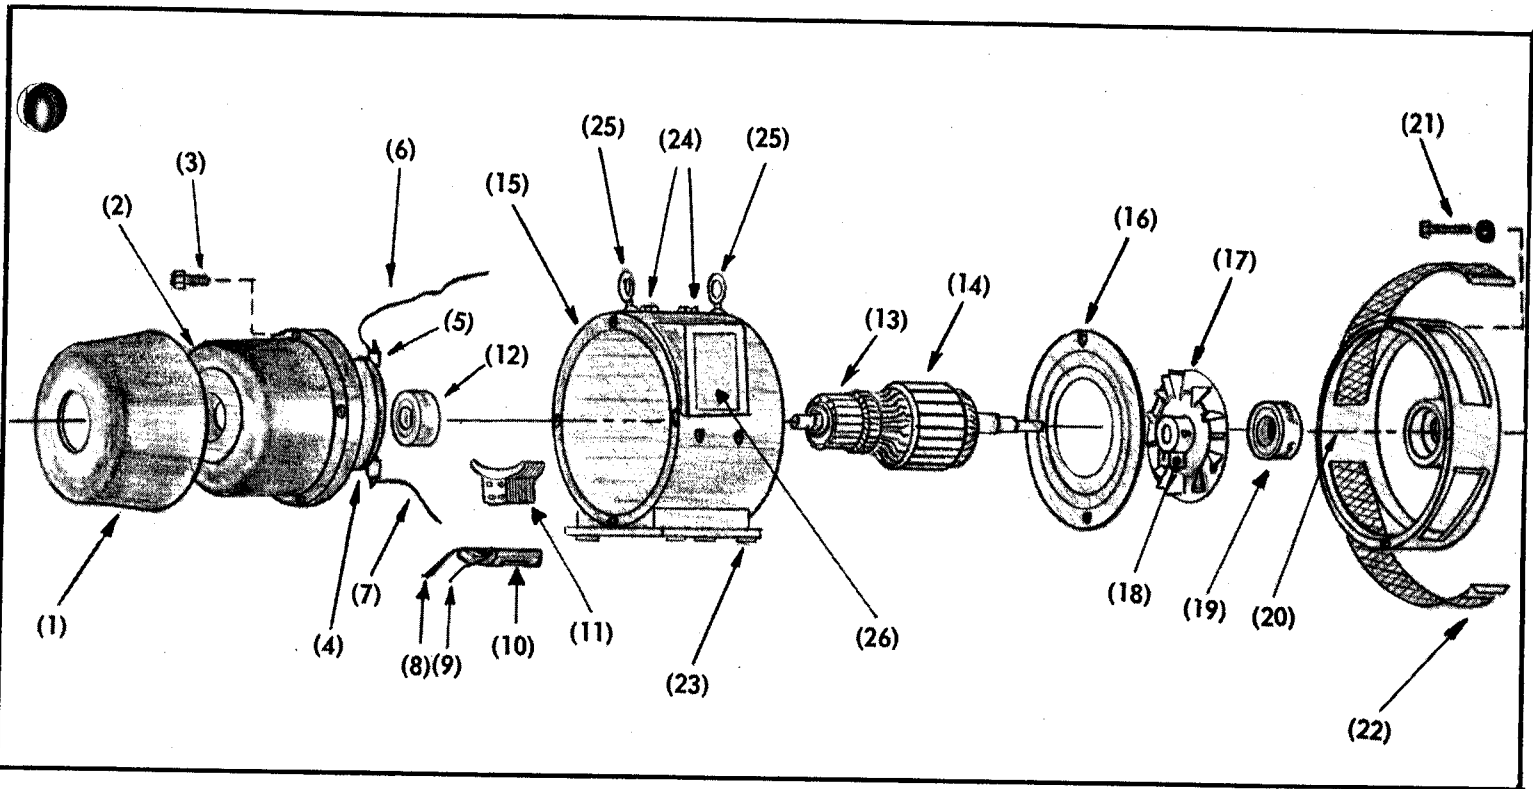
Parts Drawing, Typical Two Bearing DC Generator, Exploded View
